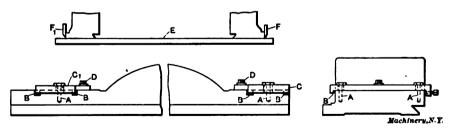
Jigs for Drilling Stud Holes in Back of Cross-rall. Setting of Jig Ci endwise is accomplished by transferring Measurement from Housings by Means of Wooden Straightedge E
